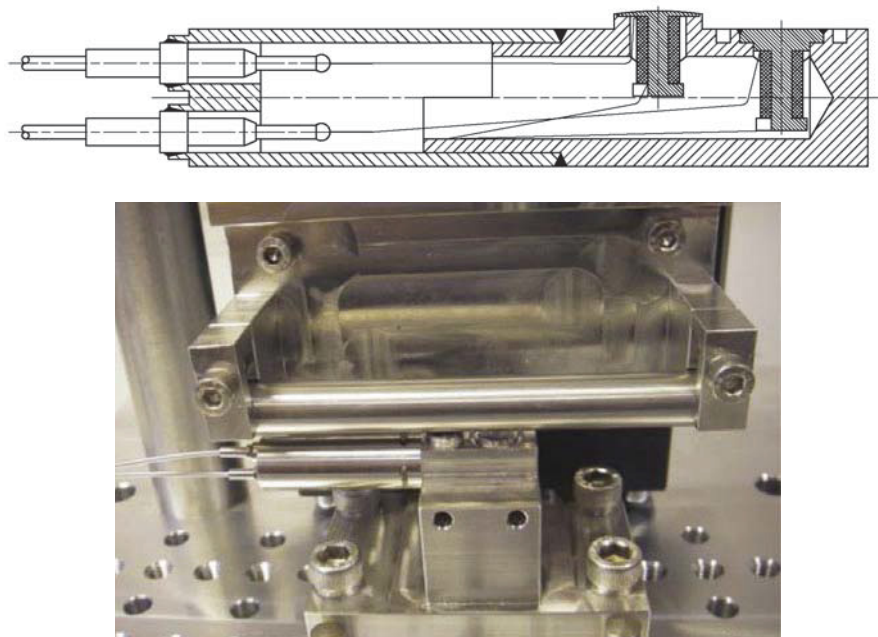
Oxide thickness probe: schematic drawing and test setup of probe with zircaloy test tube.⁶⁴
